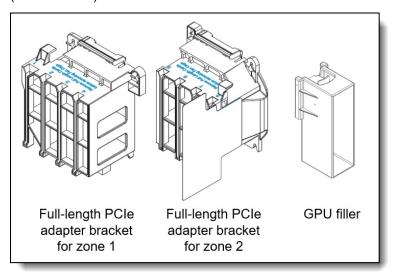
ThinkSystem ST650 V2/V3 Full Length PCIe Holder Kit (4M27A60836)
